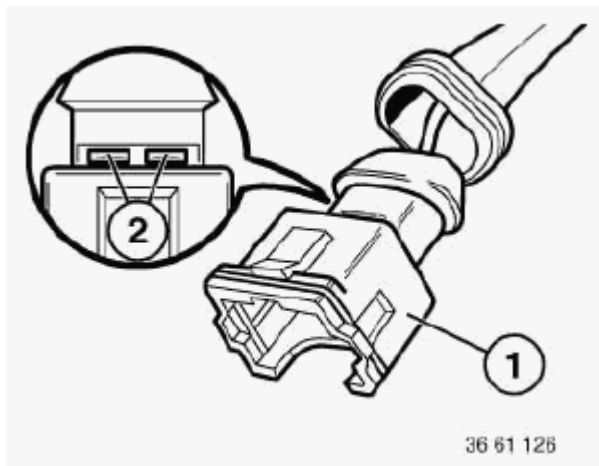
Identifying Ultrasonic-Welded Connectors
